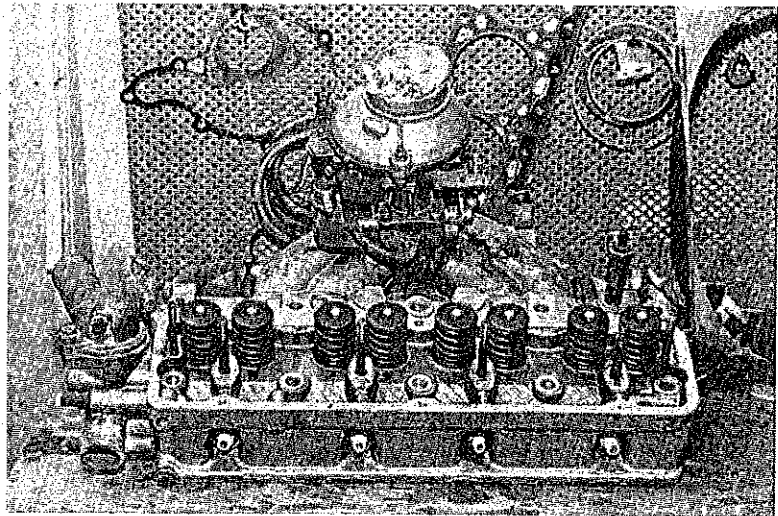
This disassembled automobile engine enables you to see its parts.
